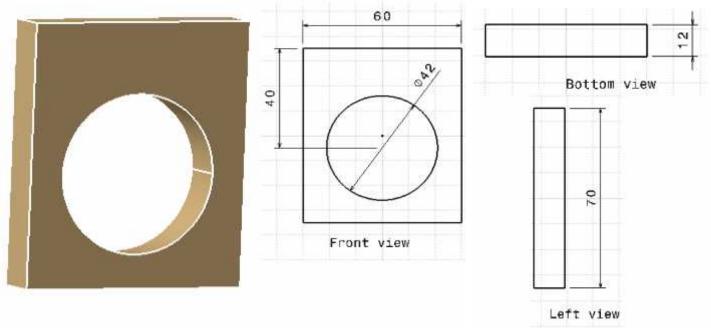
The Housing of Ball Bearings (all dimensions are in mm)
